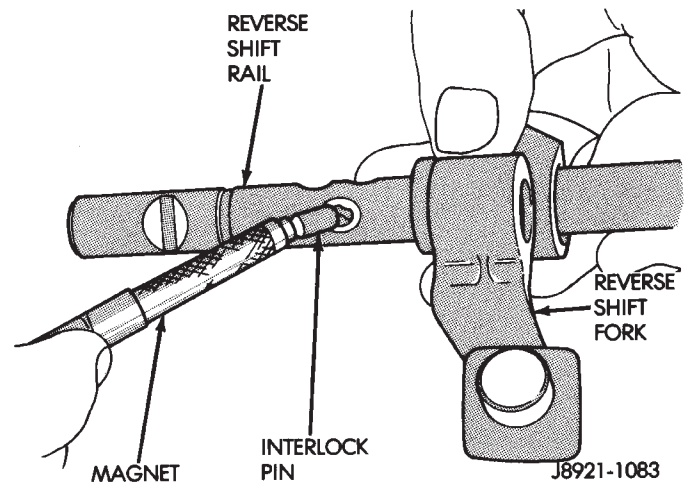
Removing Reverse Shift Rail Interlock Pin
